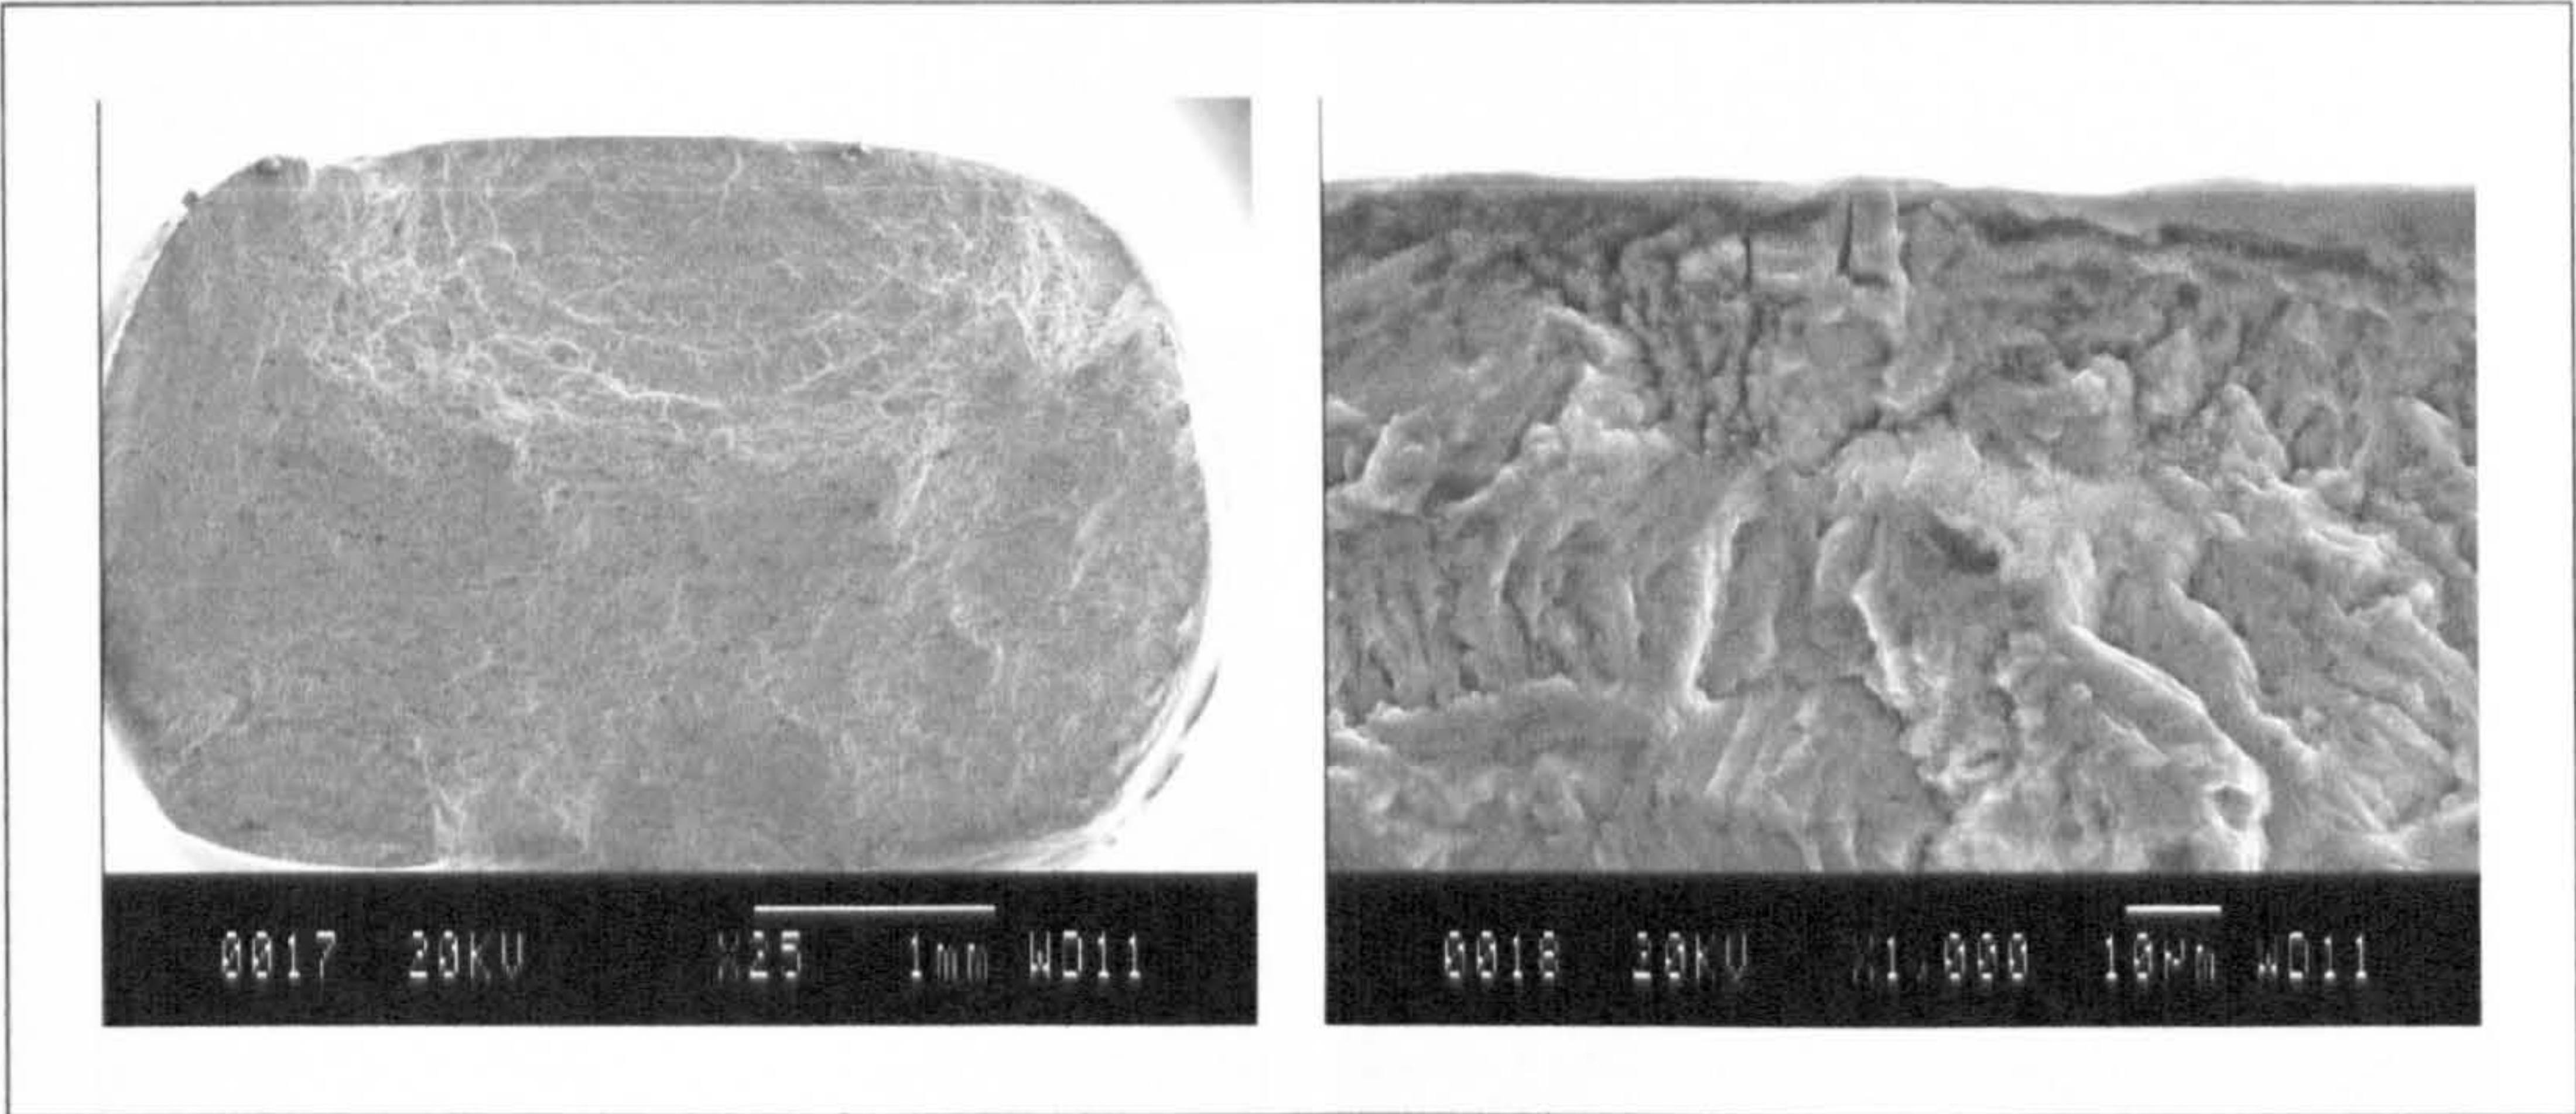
FS DPR SCG specimen fracture surface (left) and principal crack initiation site (right).
